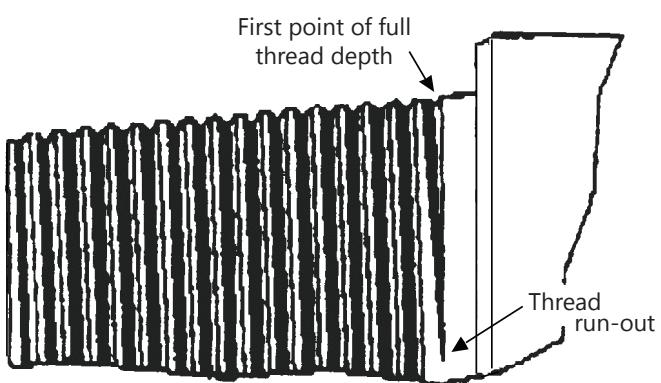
Pin thread run-out. Special care must be taken to ensure that full roller force is applied to the last machining marks in this area. The same consideration must be given to the box thread run-out.
